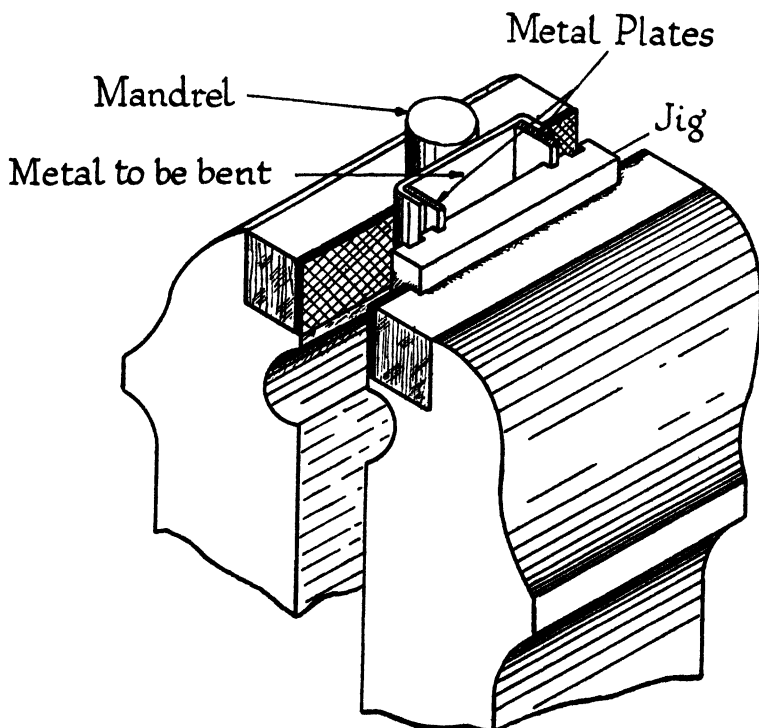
USING A MANDREL AND VICE TO BEND METAL TO A SEMICIRCLE
